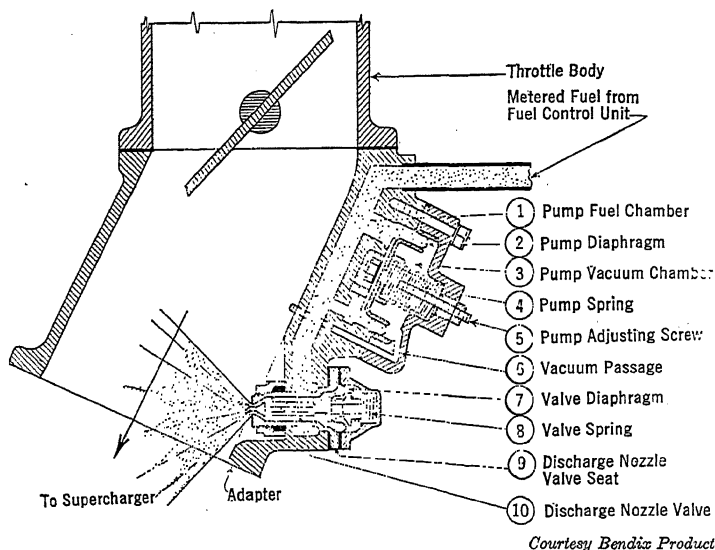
Diagram of injection carburetor adapter with single-diaphragm acceleration pump and spray nozzle.
